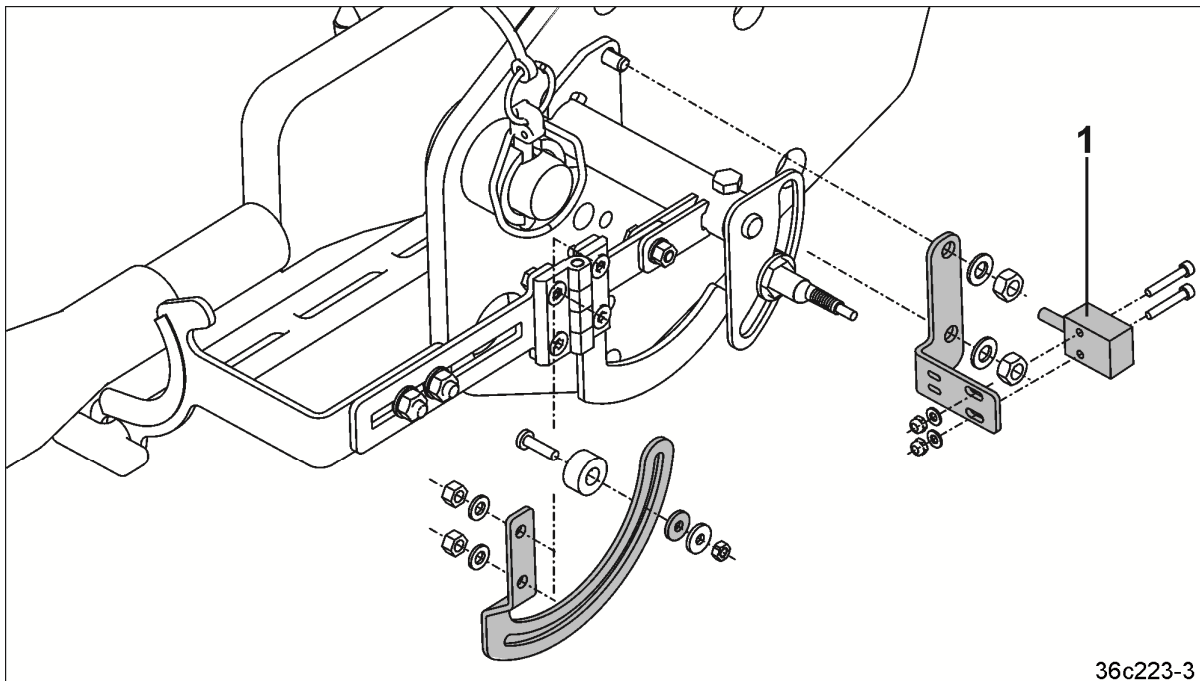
Fasten the working position sensor (Fig. 104/1) onto the upper coupling point of the soil tillage implement using the supplied assembly instructions.
